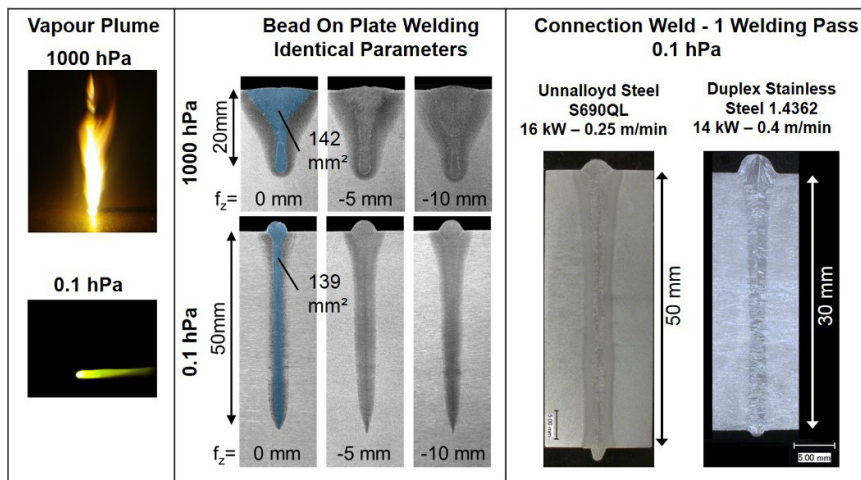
Benefit of the pressure reduction and potentials of Laser Beam Welding in Vacuum.
